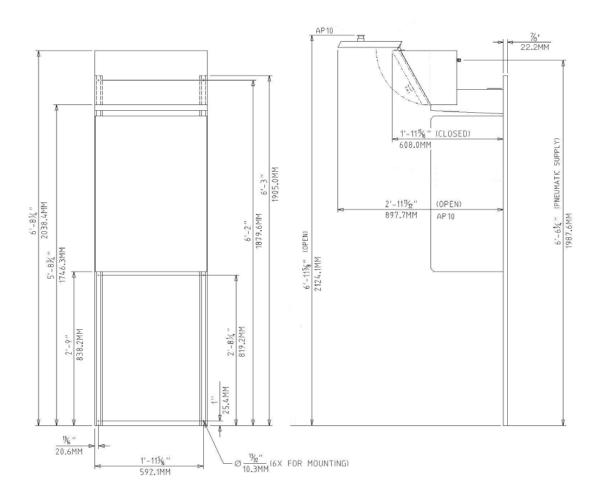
Outline Dimensions 24" Valve Manifold Panel Rack (4 stick)
